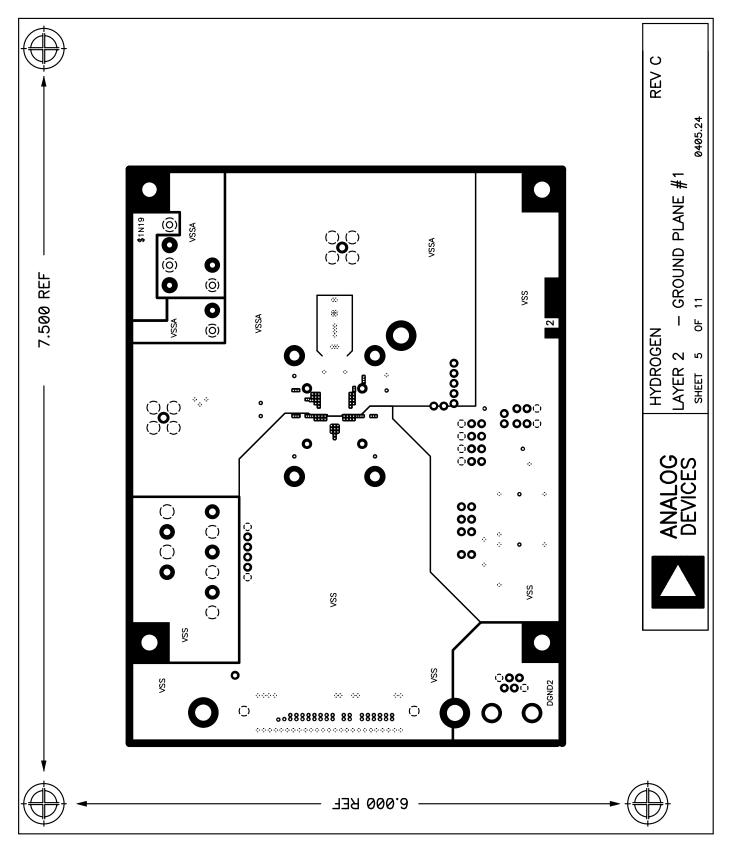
PCB Layout Layer 2, AD9736 Evaluation Board, Rev C
